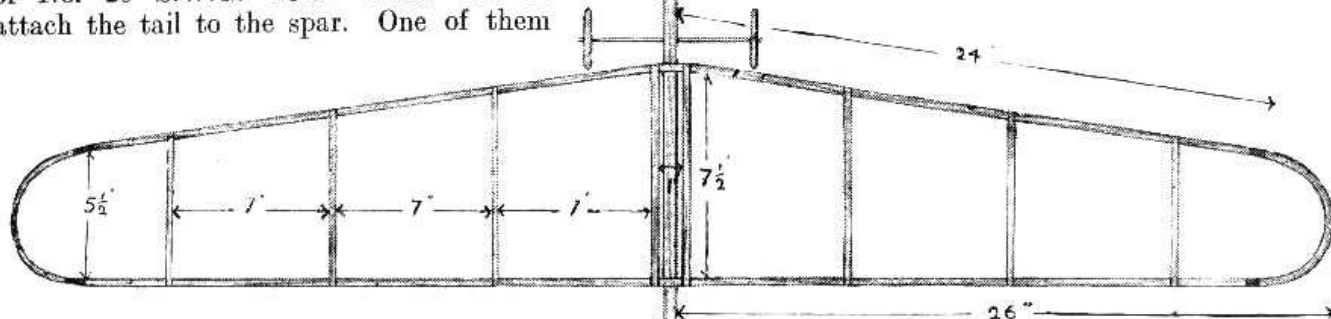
Details of the wings and tail plane are all shown in this diagram.
